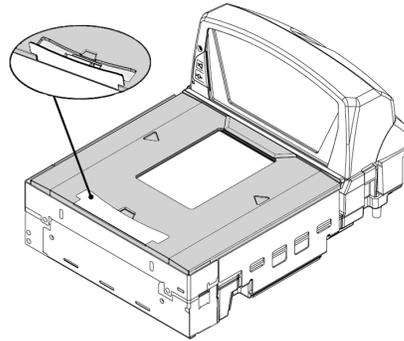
Calibration Switch/Button Wire Security Seal Assembly.
